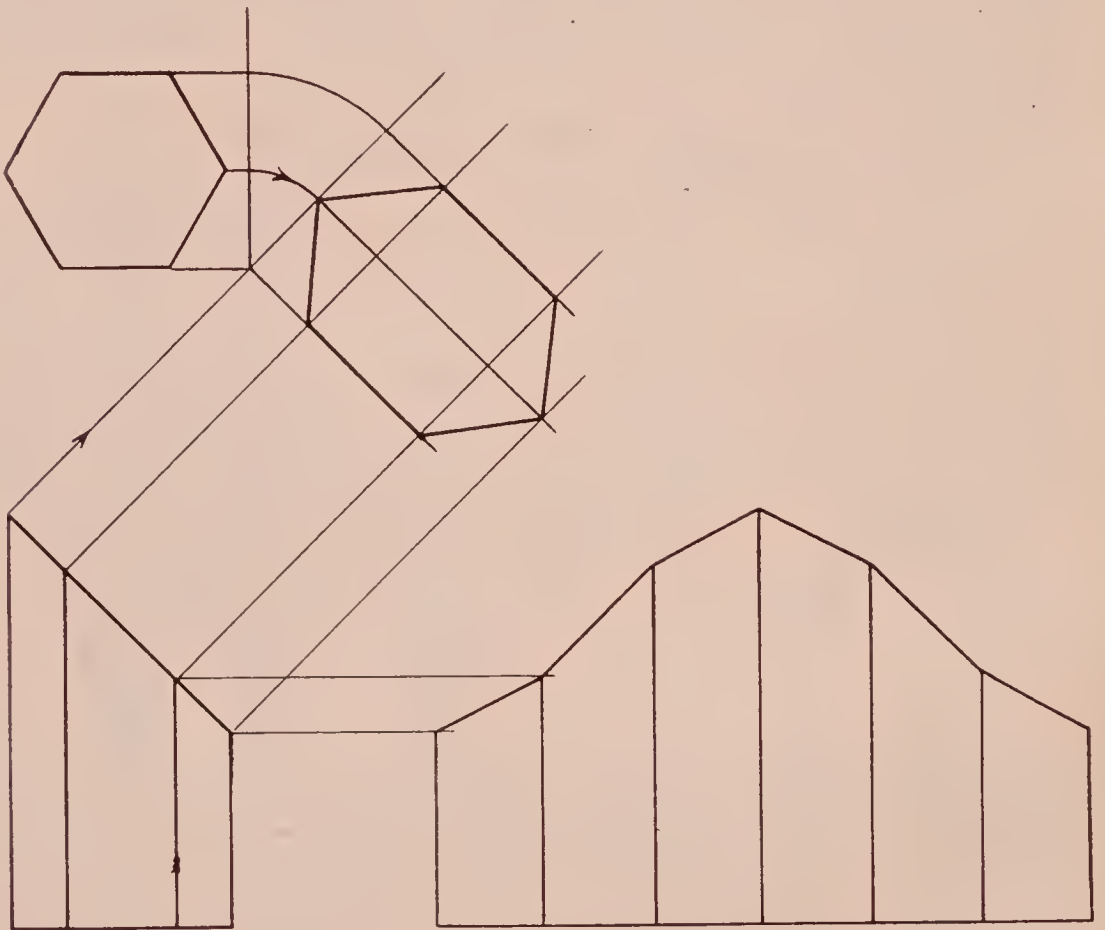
Two views, auxiliary view and development, of lateral surface of frustum of prism.
